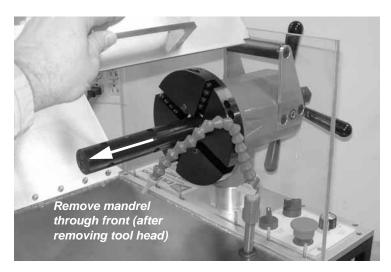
Remove the mandrel through the front of the machine, using the procedure in this section.
